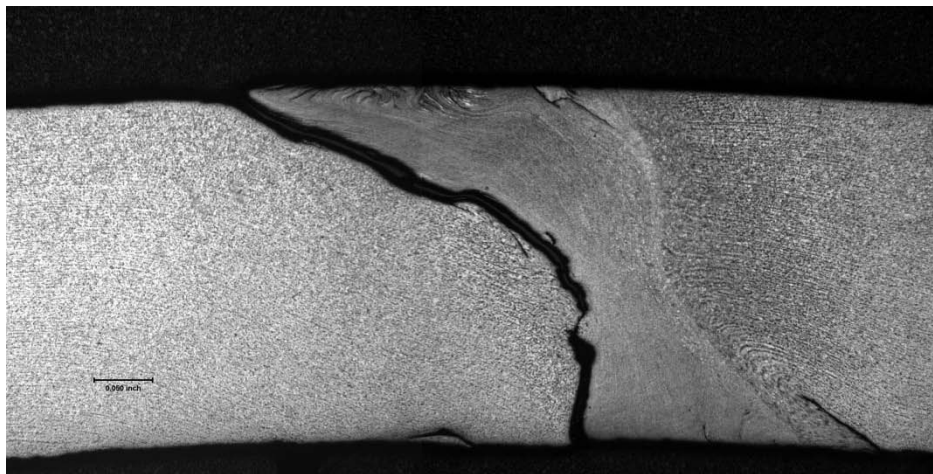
Cold Weld in LF-ERW Pipe Containing Melted Material
